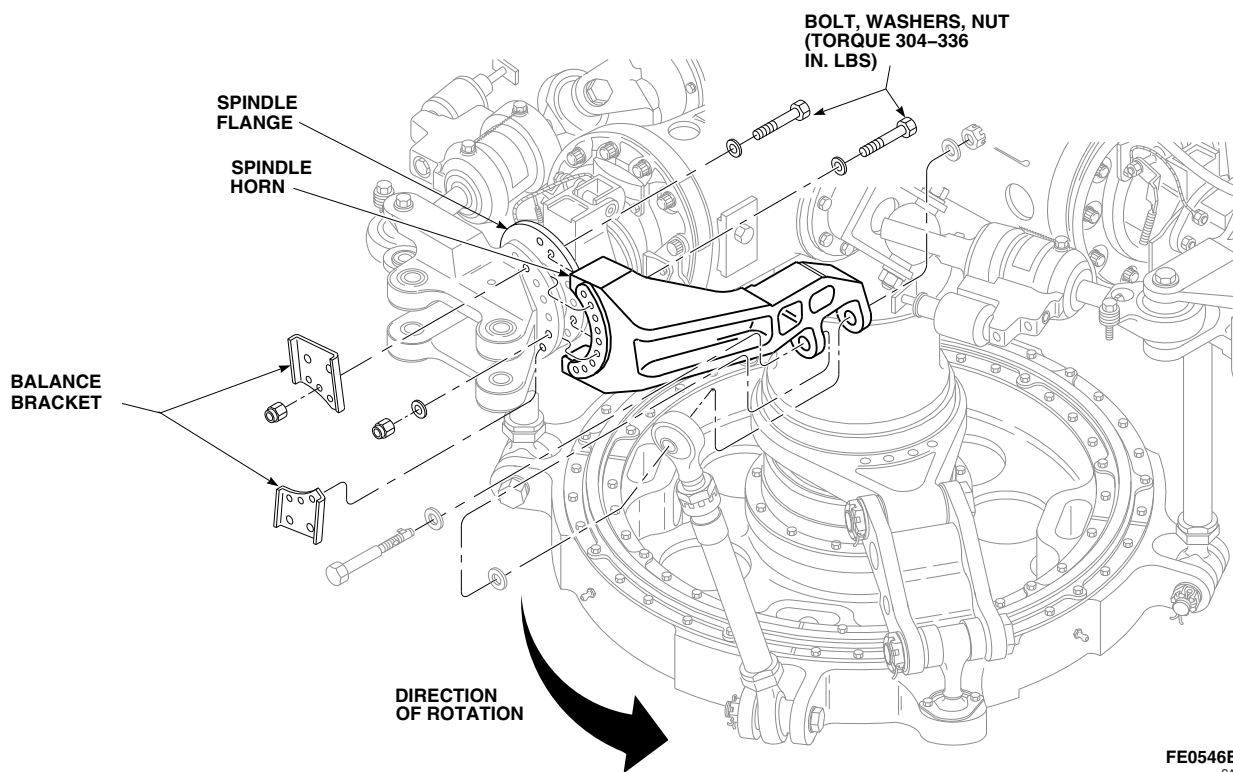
REPLACE SPINDLE HORN
